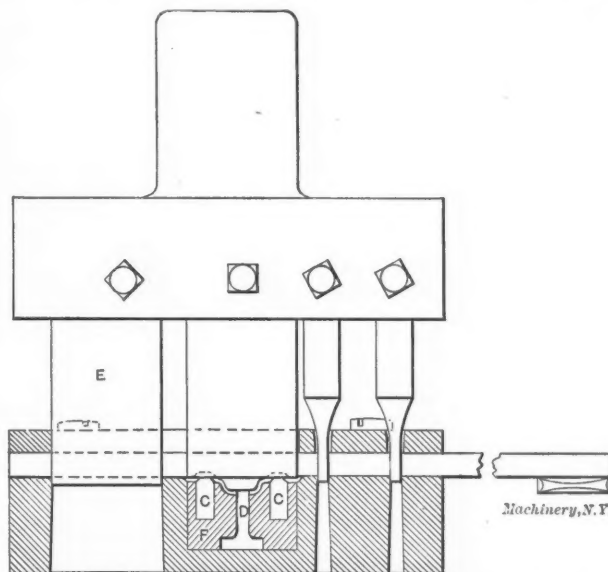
Progressive Punch and Die for Forming Plates shown at A in Fig. 1.
